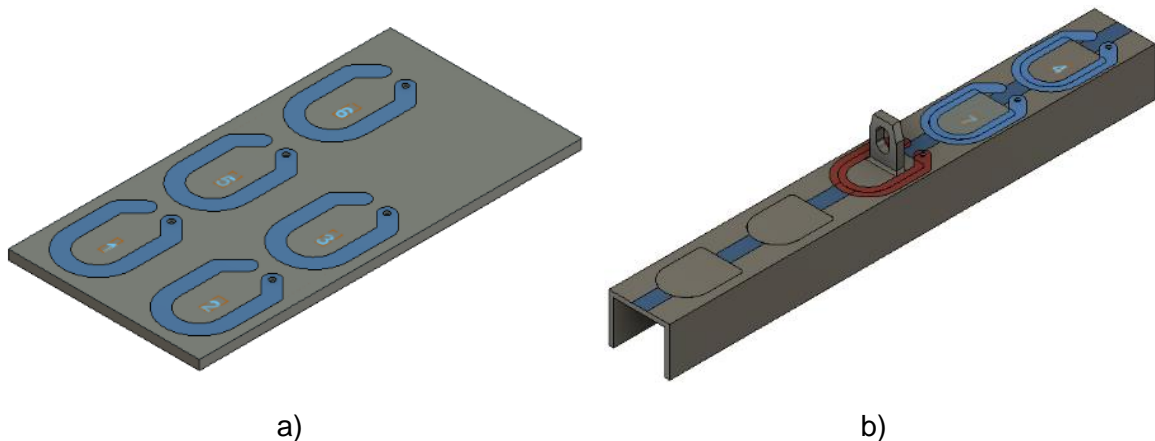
Tool - bracket disposition, a) tolerances needed and b) new tool.
